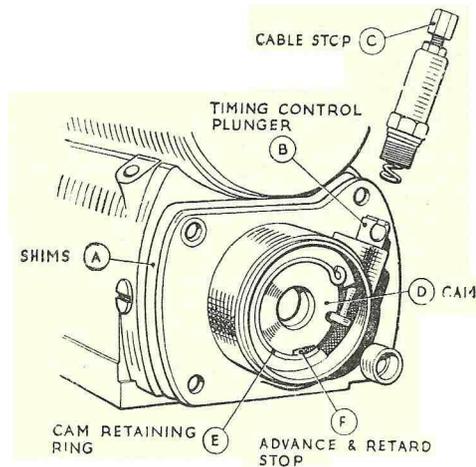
Contact breaker housing, showing timing control mechanism
